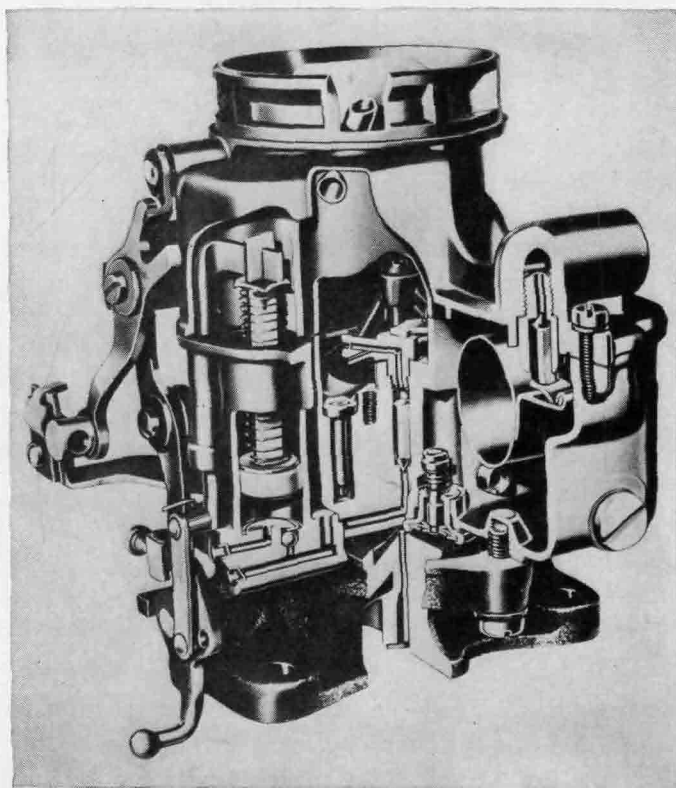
Partial cutaway view of a carburetor showing accelerator pump and high-speed circuits. (Ford Motor Company)
